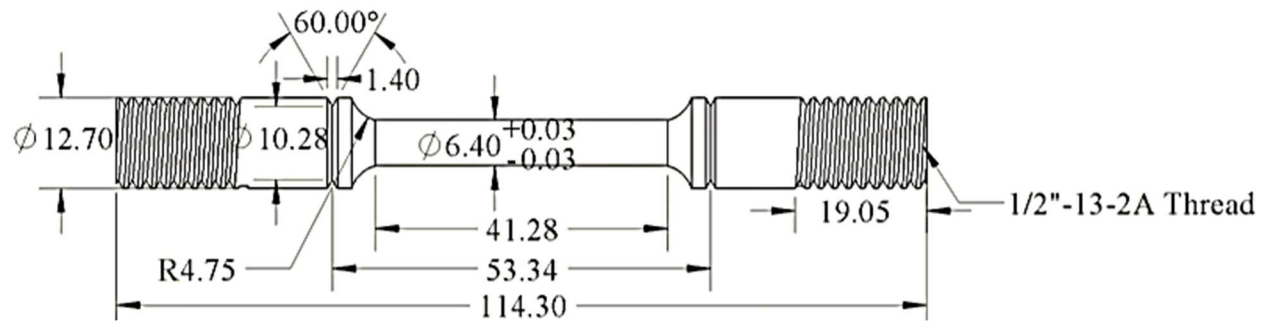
Drawing of the creep specimen. Dimensions are in mm.
